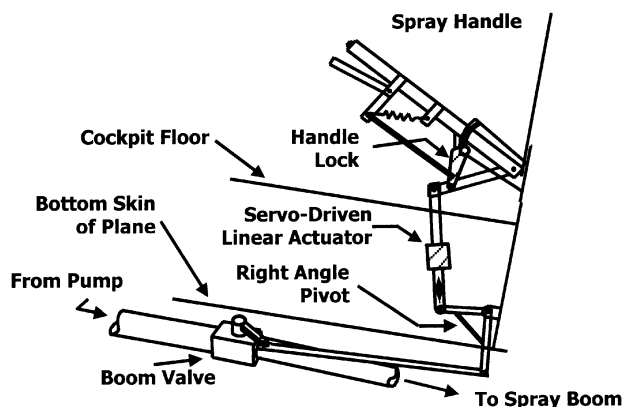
Control actuator for the AutoCal I was positioned in the linkage between the boom valve handle in the cockpit and the right angle pivot. Additional modifications to the boom handle for this version were the handle lock and the lock-release mechanism.
